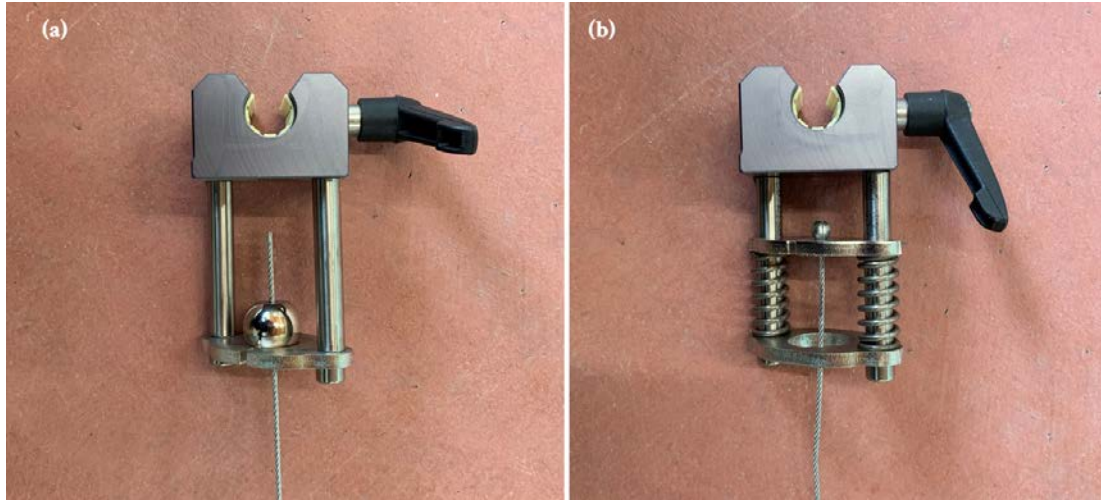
(a) Ratcheting mechanism inside a spherical wire rope holder, mounted on a clamping pillow block. (b) Compression spring mechanism mounted on clamping pillow block. The springs allow for tensioning up to ~ 98 N.
